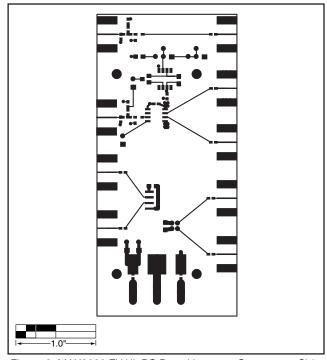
MAX3266 EV Kit PC Board Layout—Component Side
